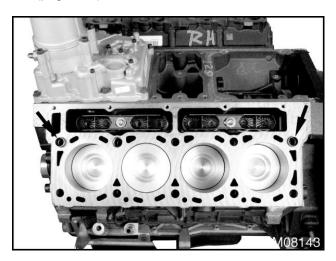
Cylinder head spring dowel pins in crankcase (typical)
